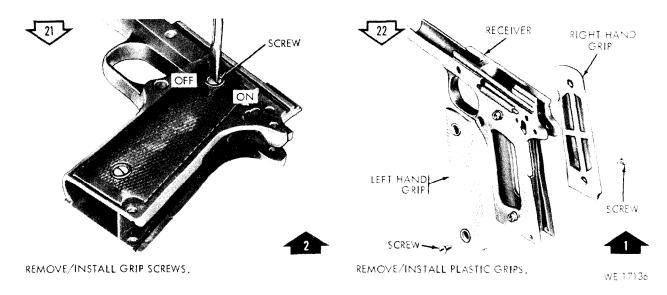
Organizational disassembly/assembly of Caliber .45, Automatic Pistol, M1911A1. (6 of 6)
